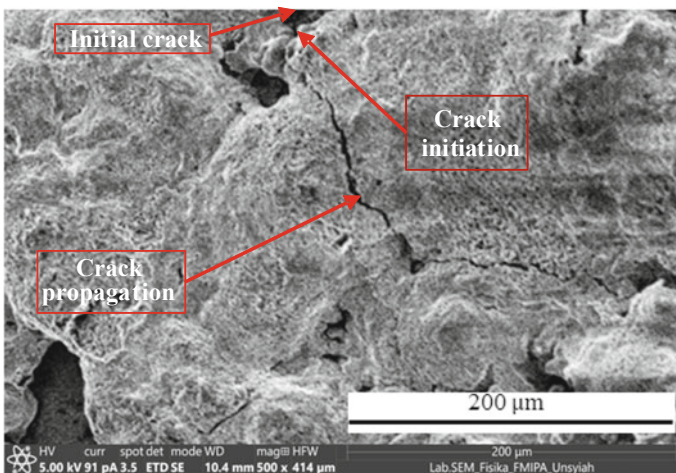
Fracture surface observed by SEM near the initial crack tip
